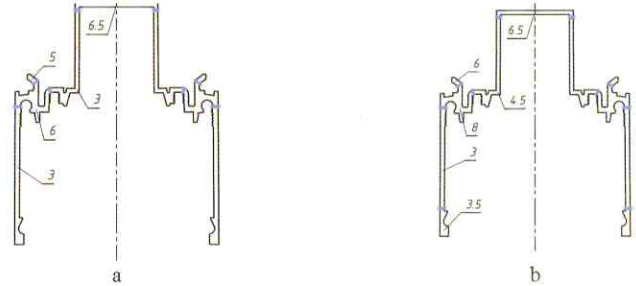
Bearing design modification: (a) initial variant; (b) final variant
